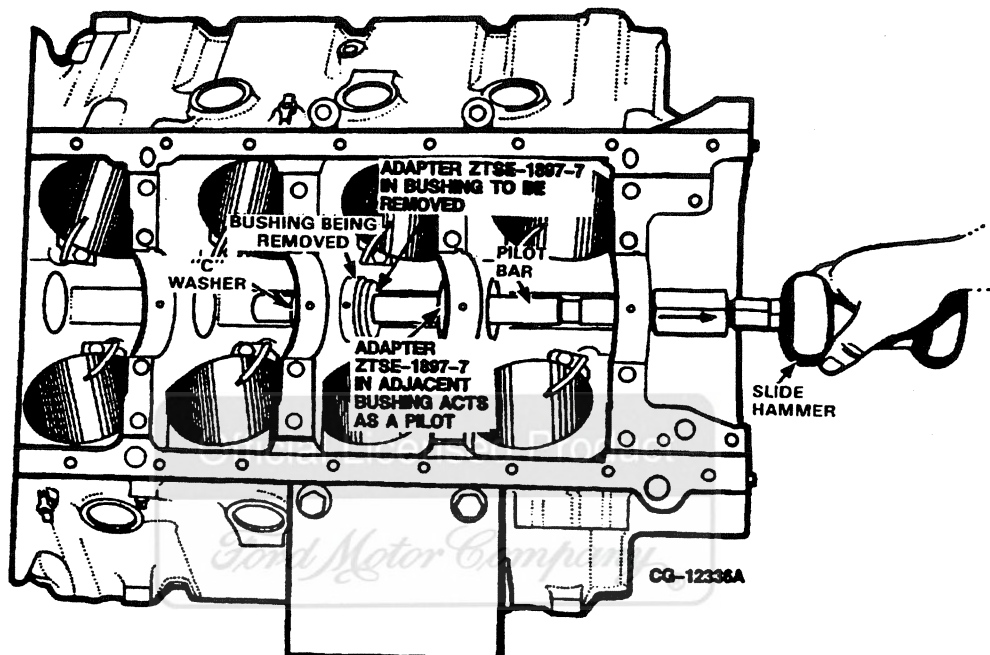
Camshaft Bushing Removal (No. 3 Bushing Removal Shown)
